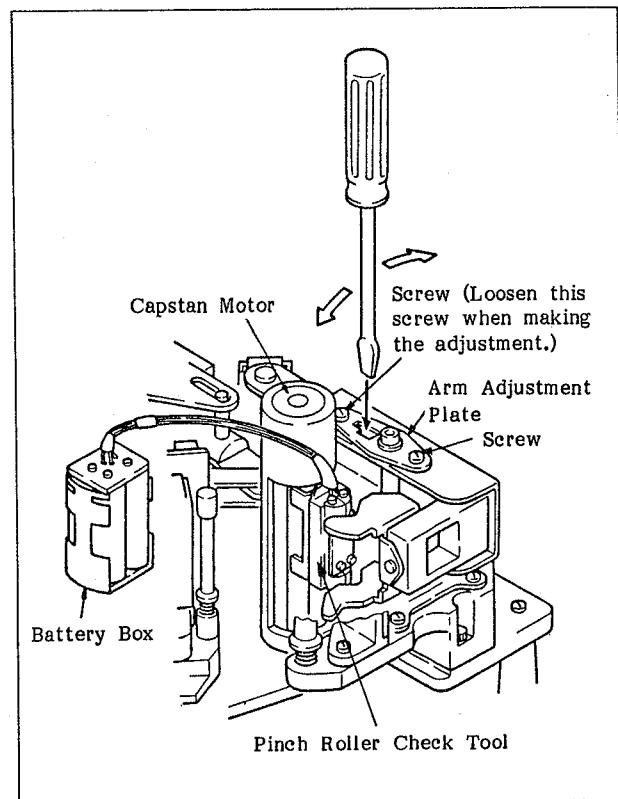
Fine Adjustment of the Pinch Roller Plate Azimuth
